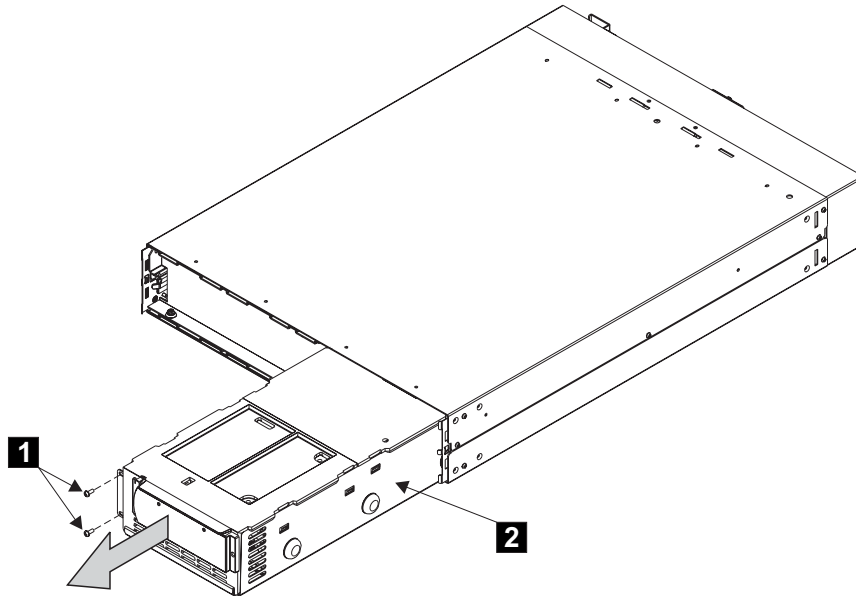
Removing the uninterruptible power supply 5125 electronics assembly
